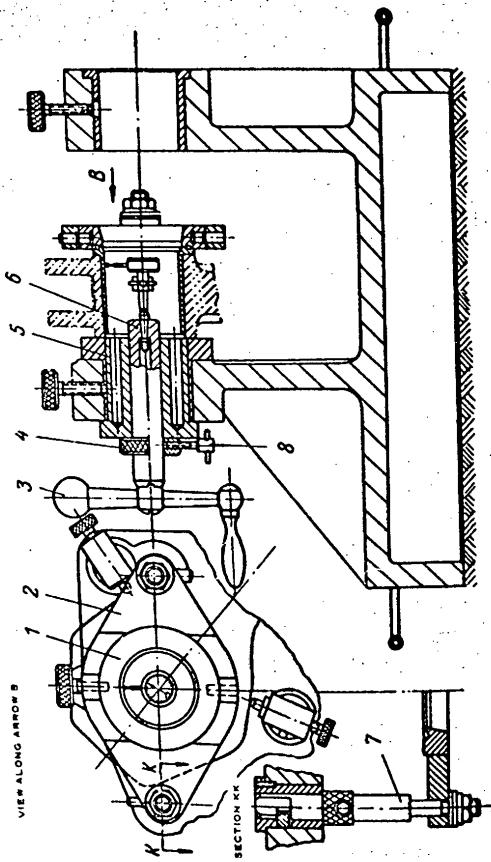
CENTRING OF MASTER ROD IN JIG FOR BORING CRANKPIN END BUSHING
